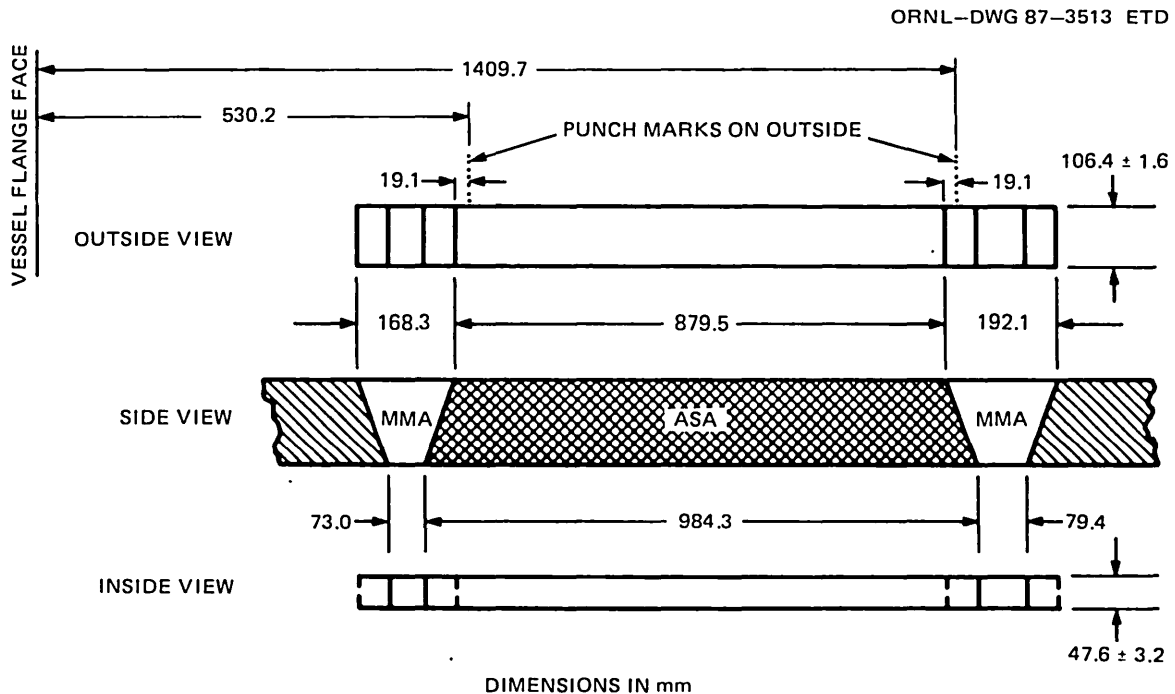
Dimensions at the special seam weld of the vessel.
